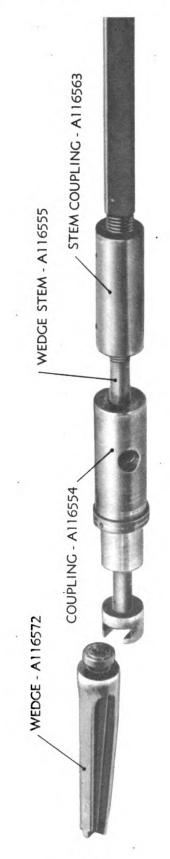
Head Tube and Wedge Operating Rod (0.75-inch Star Gage)
